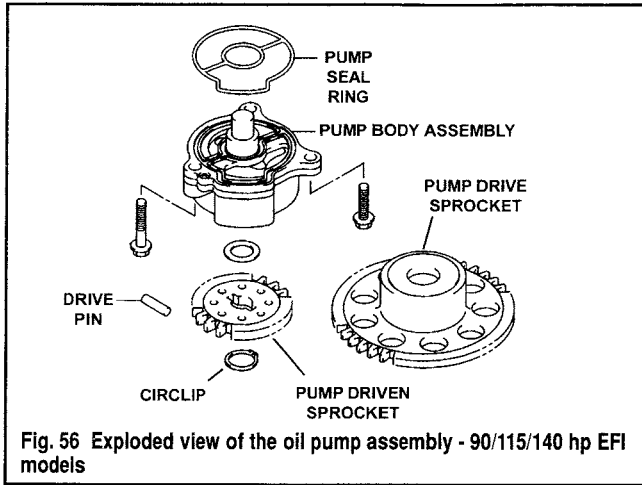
Exploded view of the oil pump assembly - 90/115/140 hp EFI models
